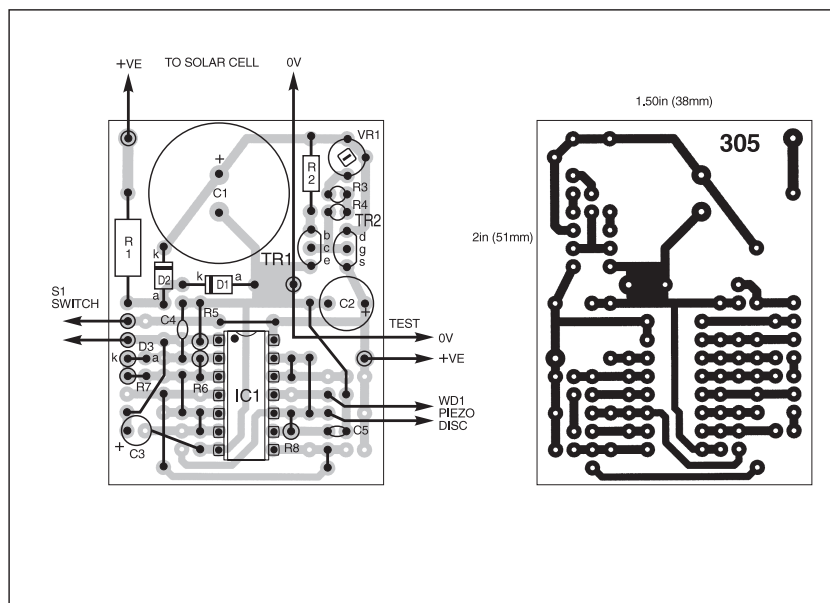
Uniboard p.c.b. component layout and full-size copper foil master for the Gate Sentinel. Includes components for the power supply regulator – see photograph.
